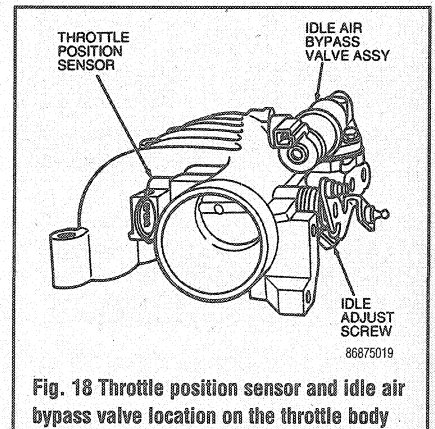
Throttle position sensor and idle air bypass valve location on the throttle body
